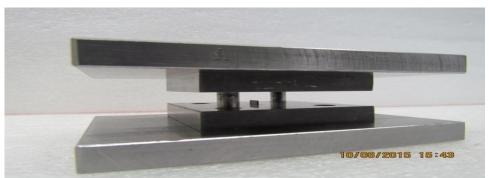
FIXTURES FOR INCORPORATING PROJECTIONS ON NICKEL TAB
